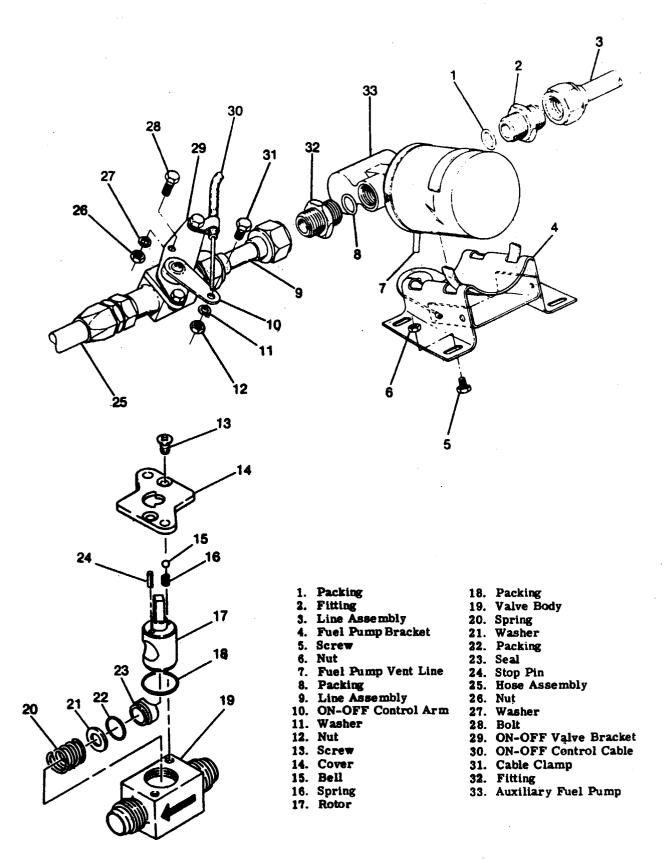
Auxiliary Fuel Pump and ON-OFF Valve.
